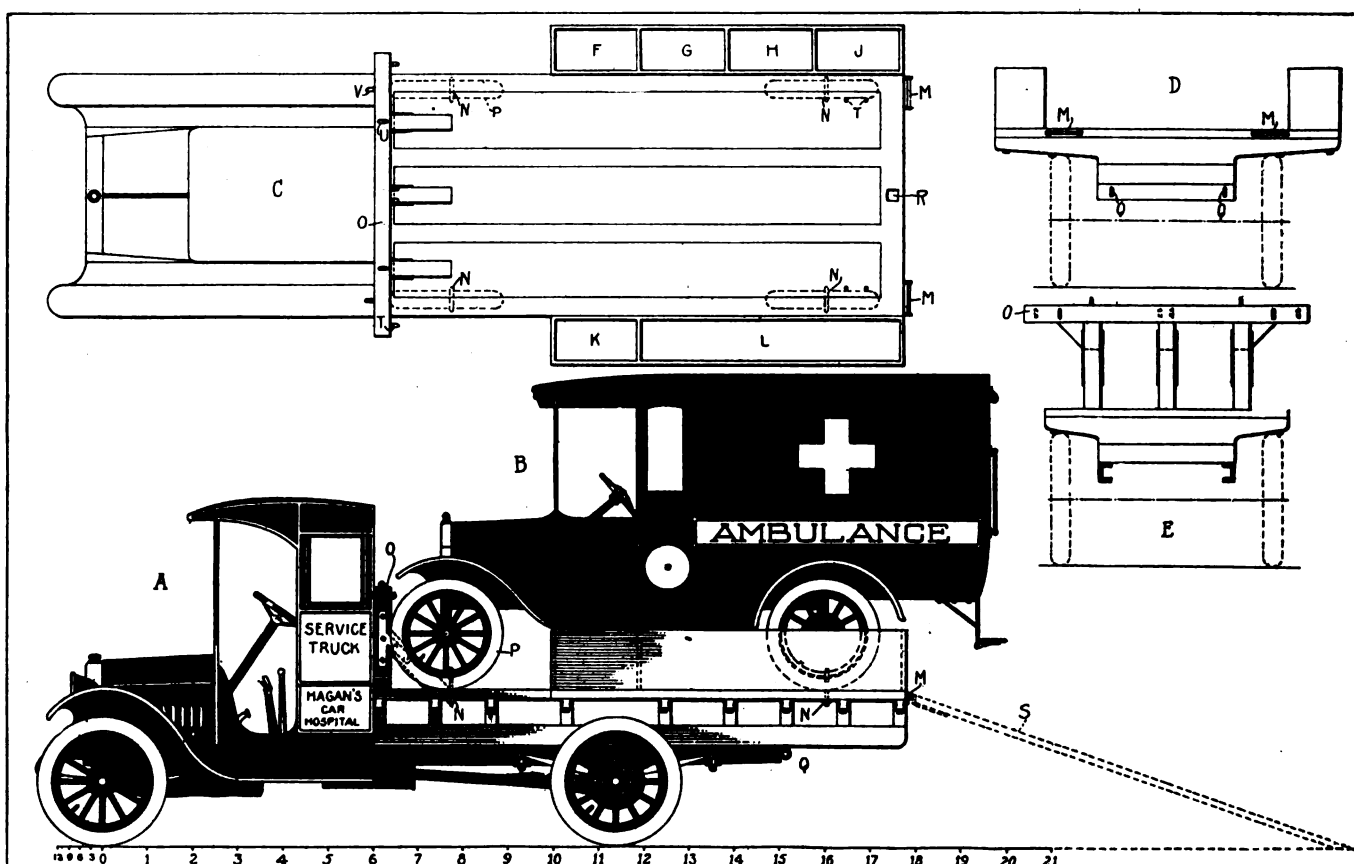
Details of the "Car Ambulance" or Service Truck, Showing How a Ford Car Could be carried in the Body of the Machine.
